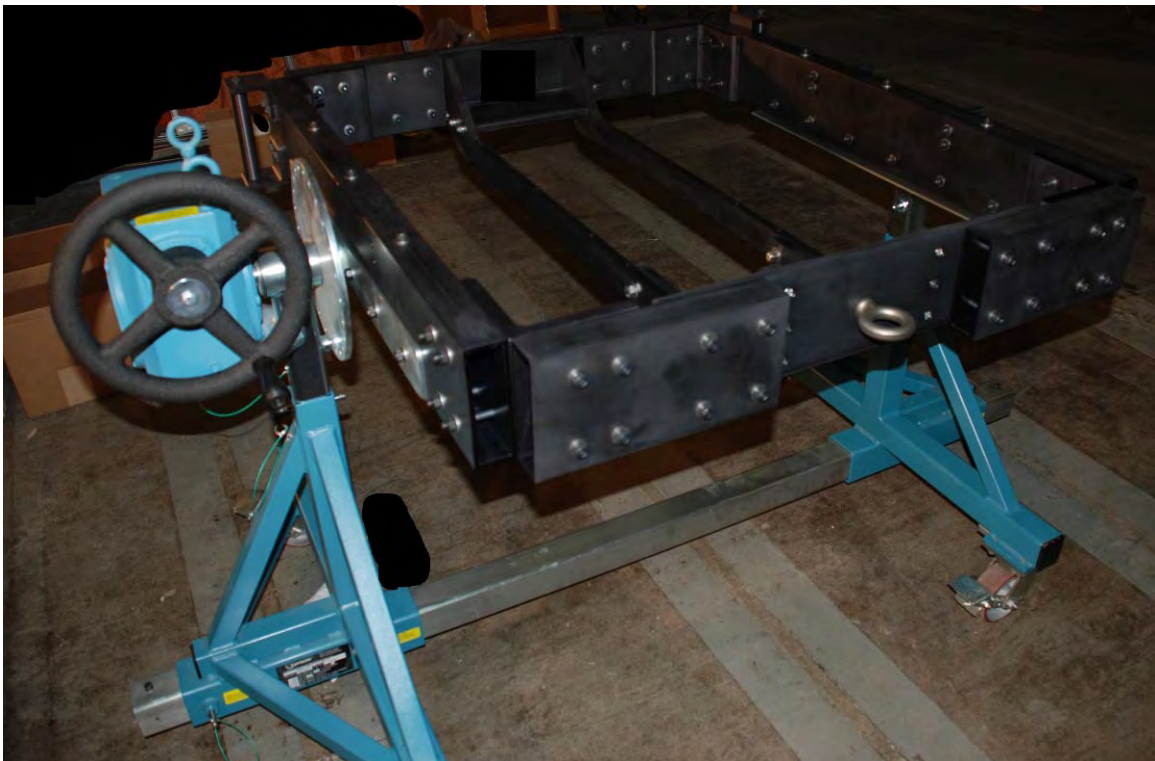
Flotron assembly rig with frame prior to thruster assembly in the horizontal position.
